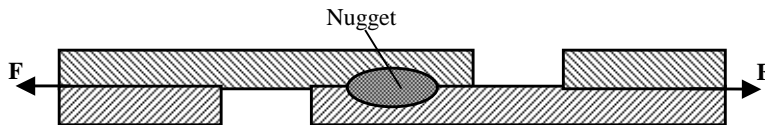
The tensile-shear loading of the spot-welded test specimen [20].
